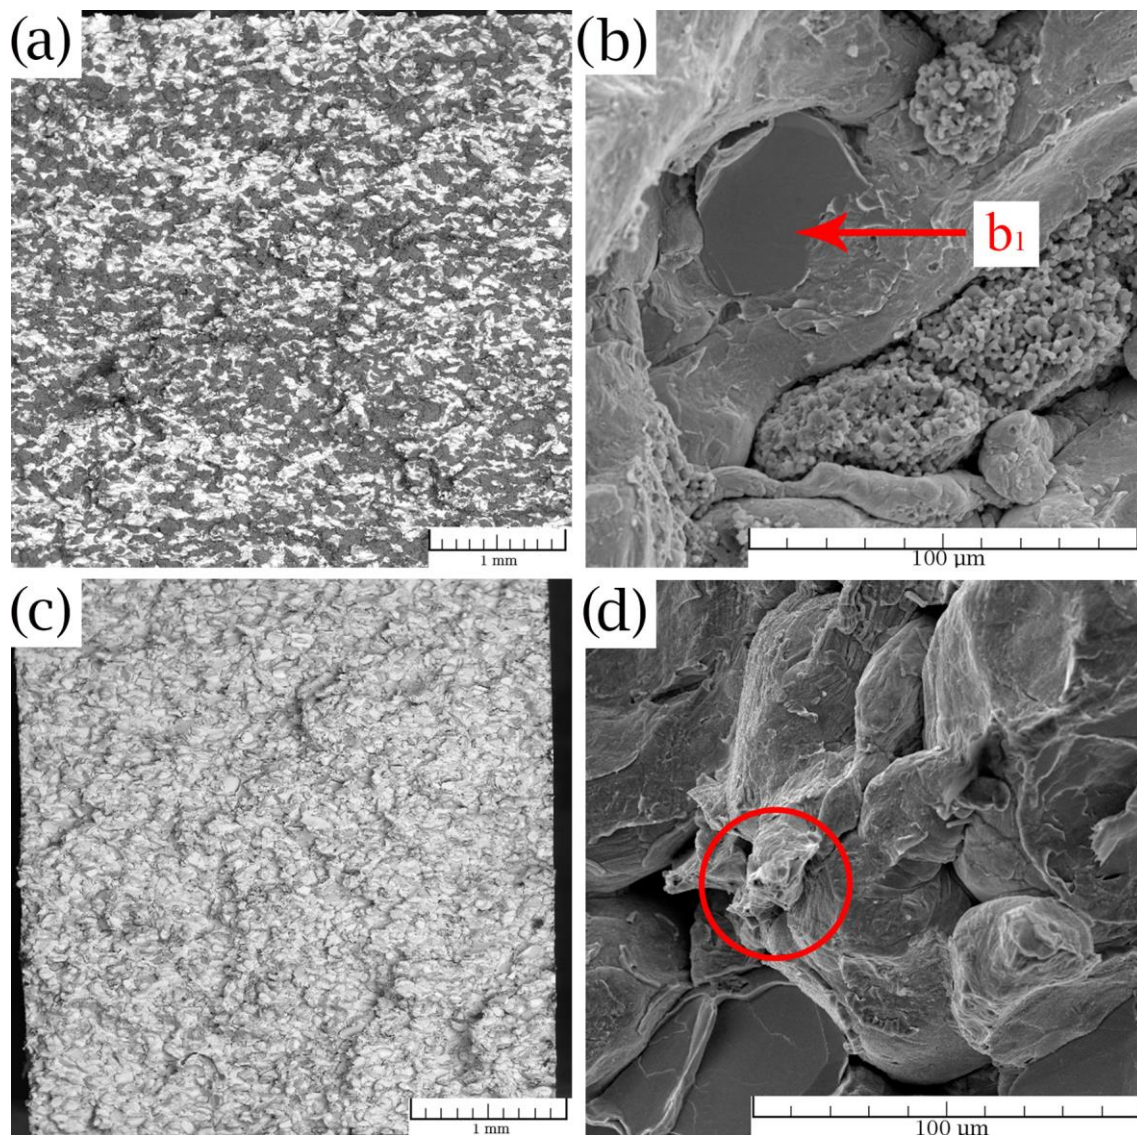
Fracture surfaces of (a,b) the sintered composite Zn/HA16 with a pointed trans-granular fracture (b1) and (c,d) pure zinc with the highlighted sign of plastic deformation.
